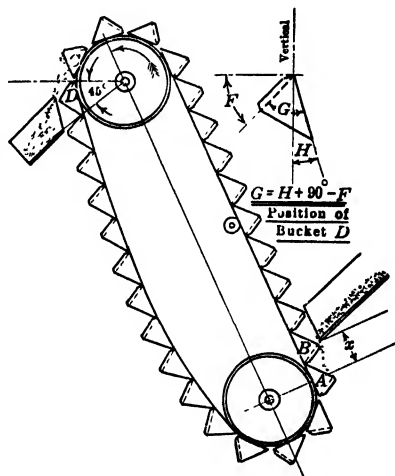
Loading and Discharging Continuous Bucket Elevator.
